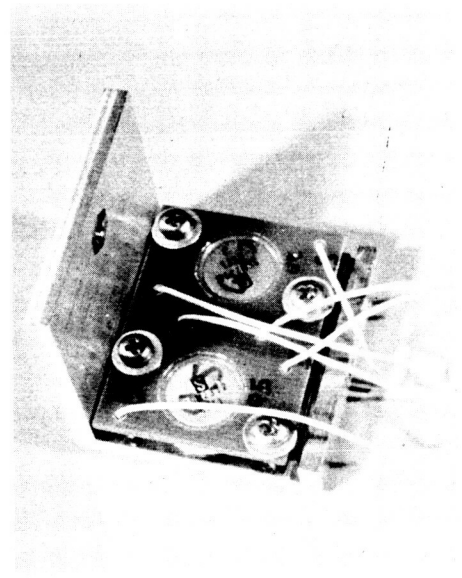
Power Transistor and Heat Sink Assembly, Assembled
